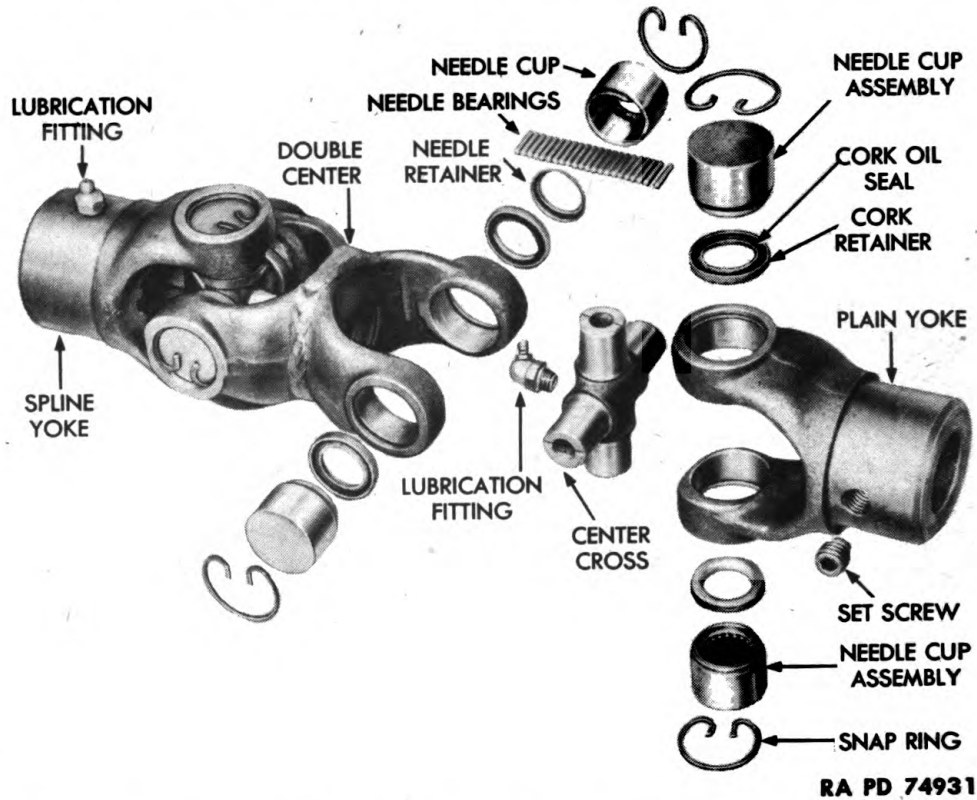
Tandem Winch Drive Shaft Universal Joint — Disassembled
